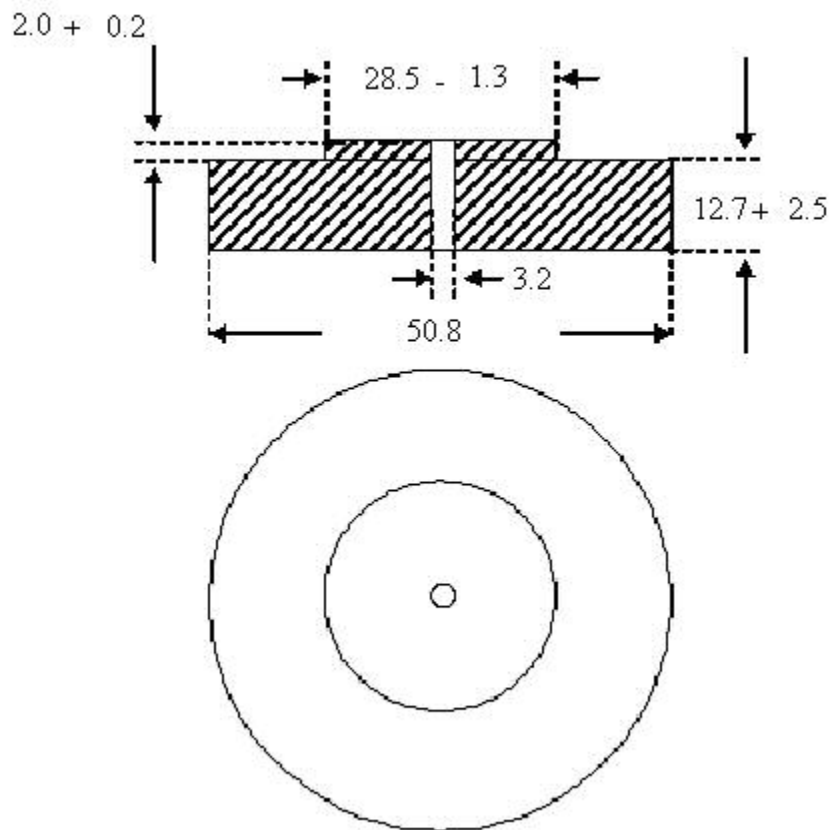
Mechanical drawing of the plug. Dimensions are in mm.
